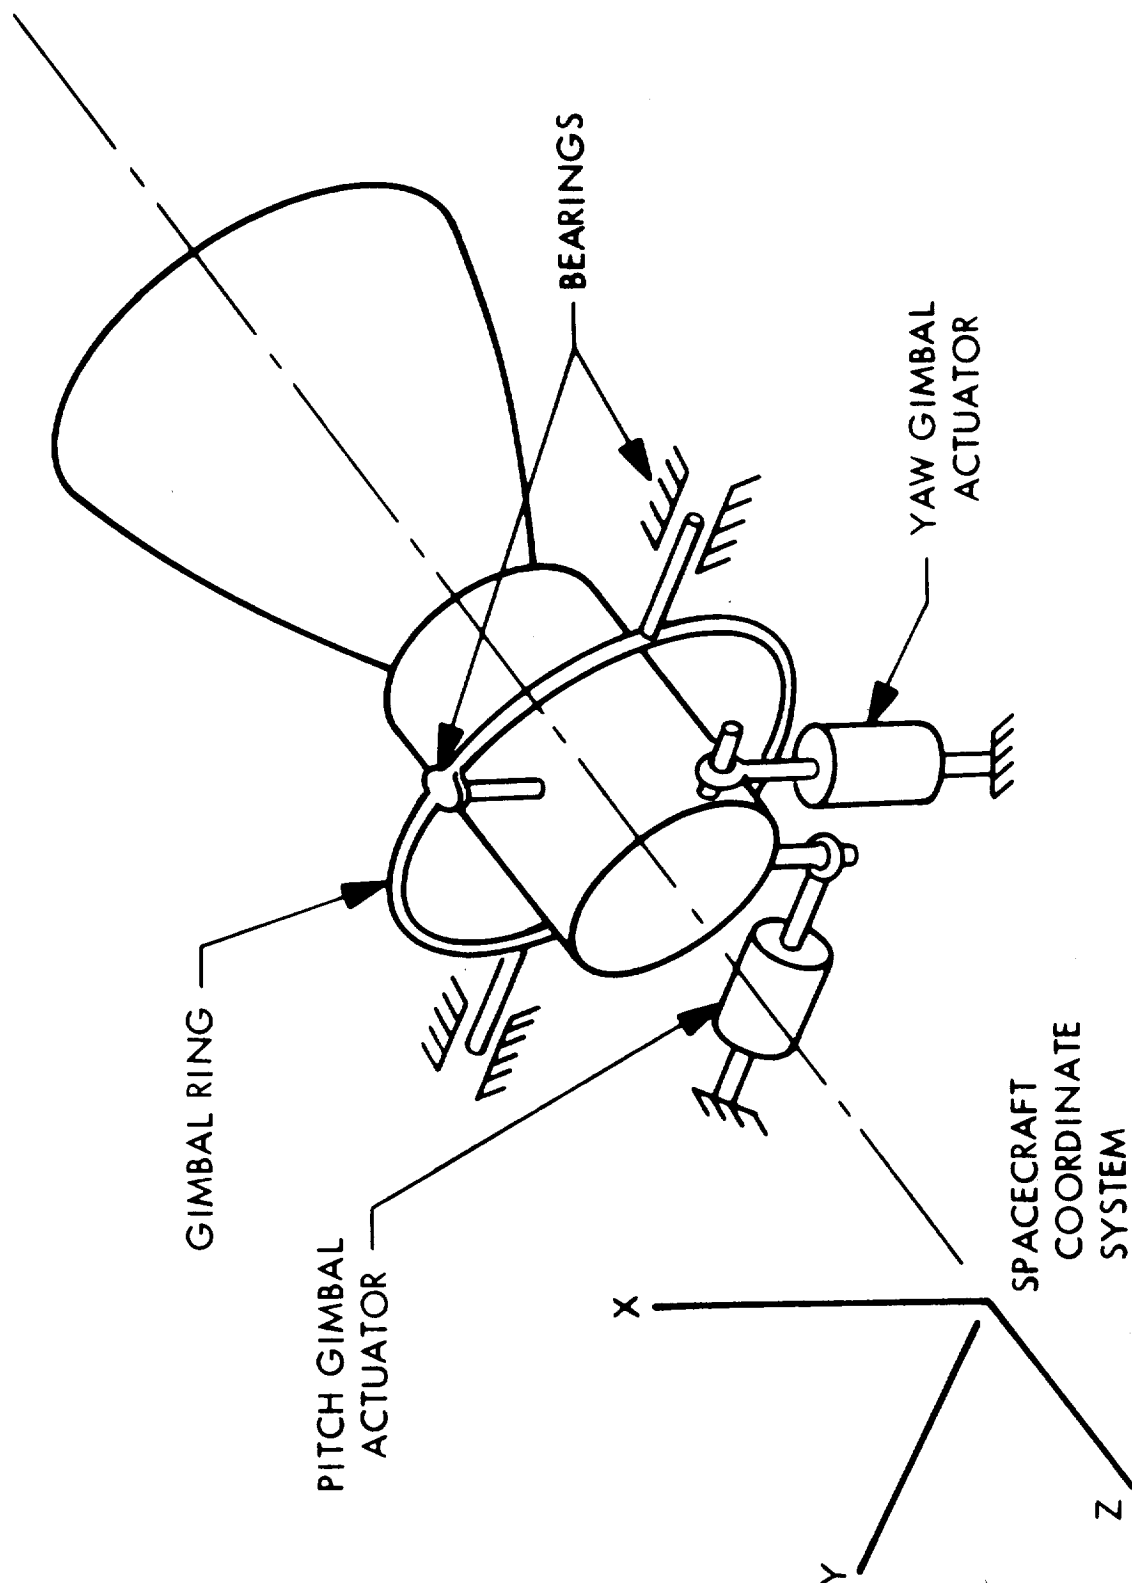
I-11. Engine and Gimbal Mounting Arrangement
